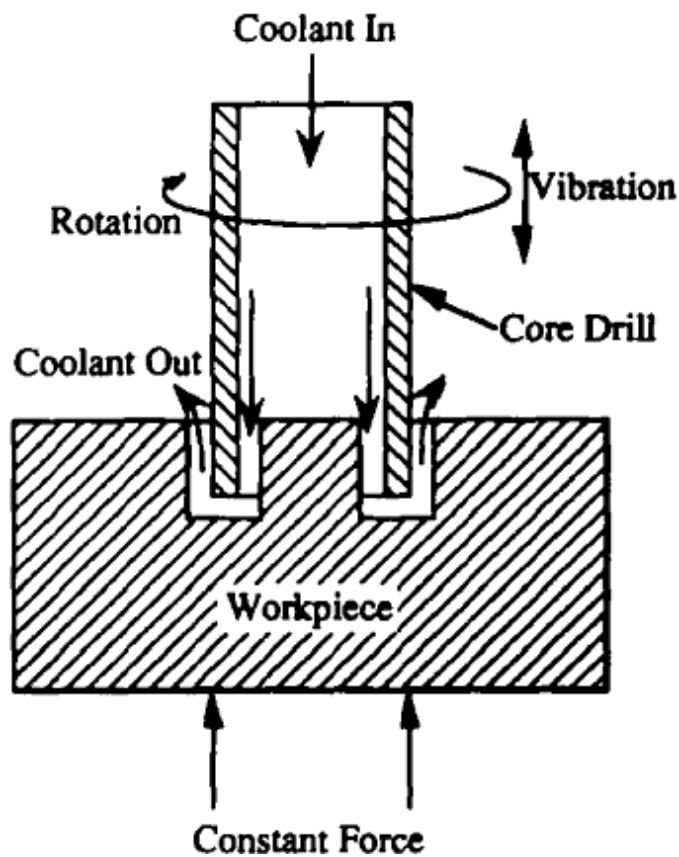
Rotary Ultrasonic Machining (RUM) process
